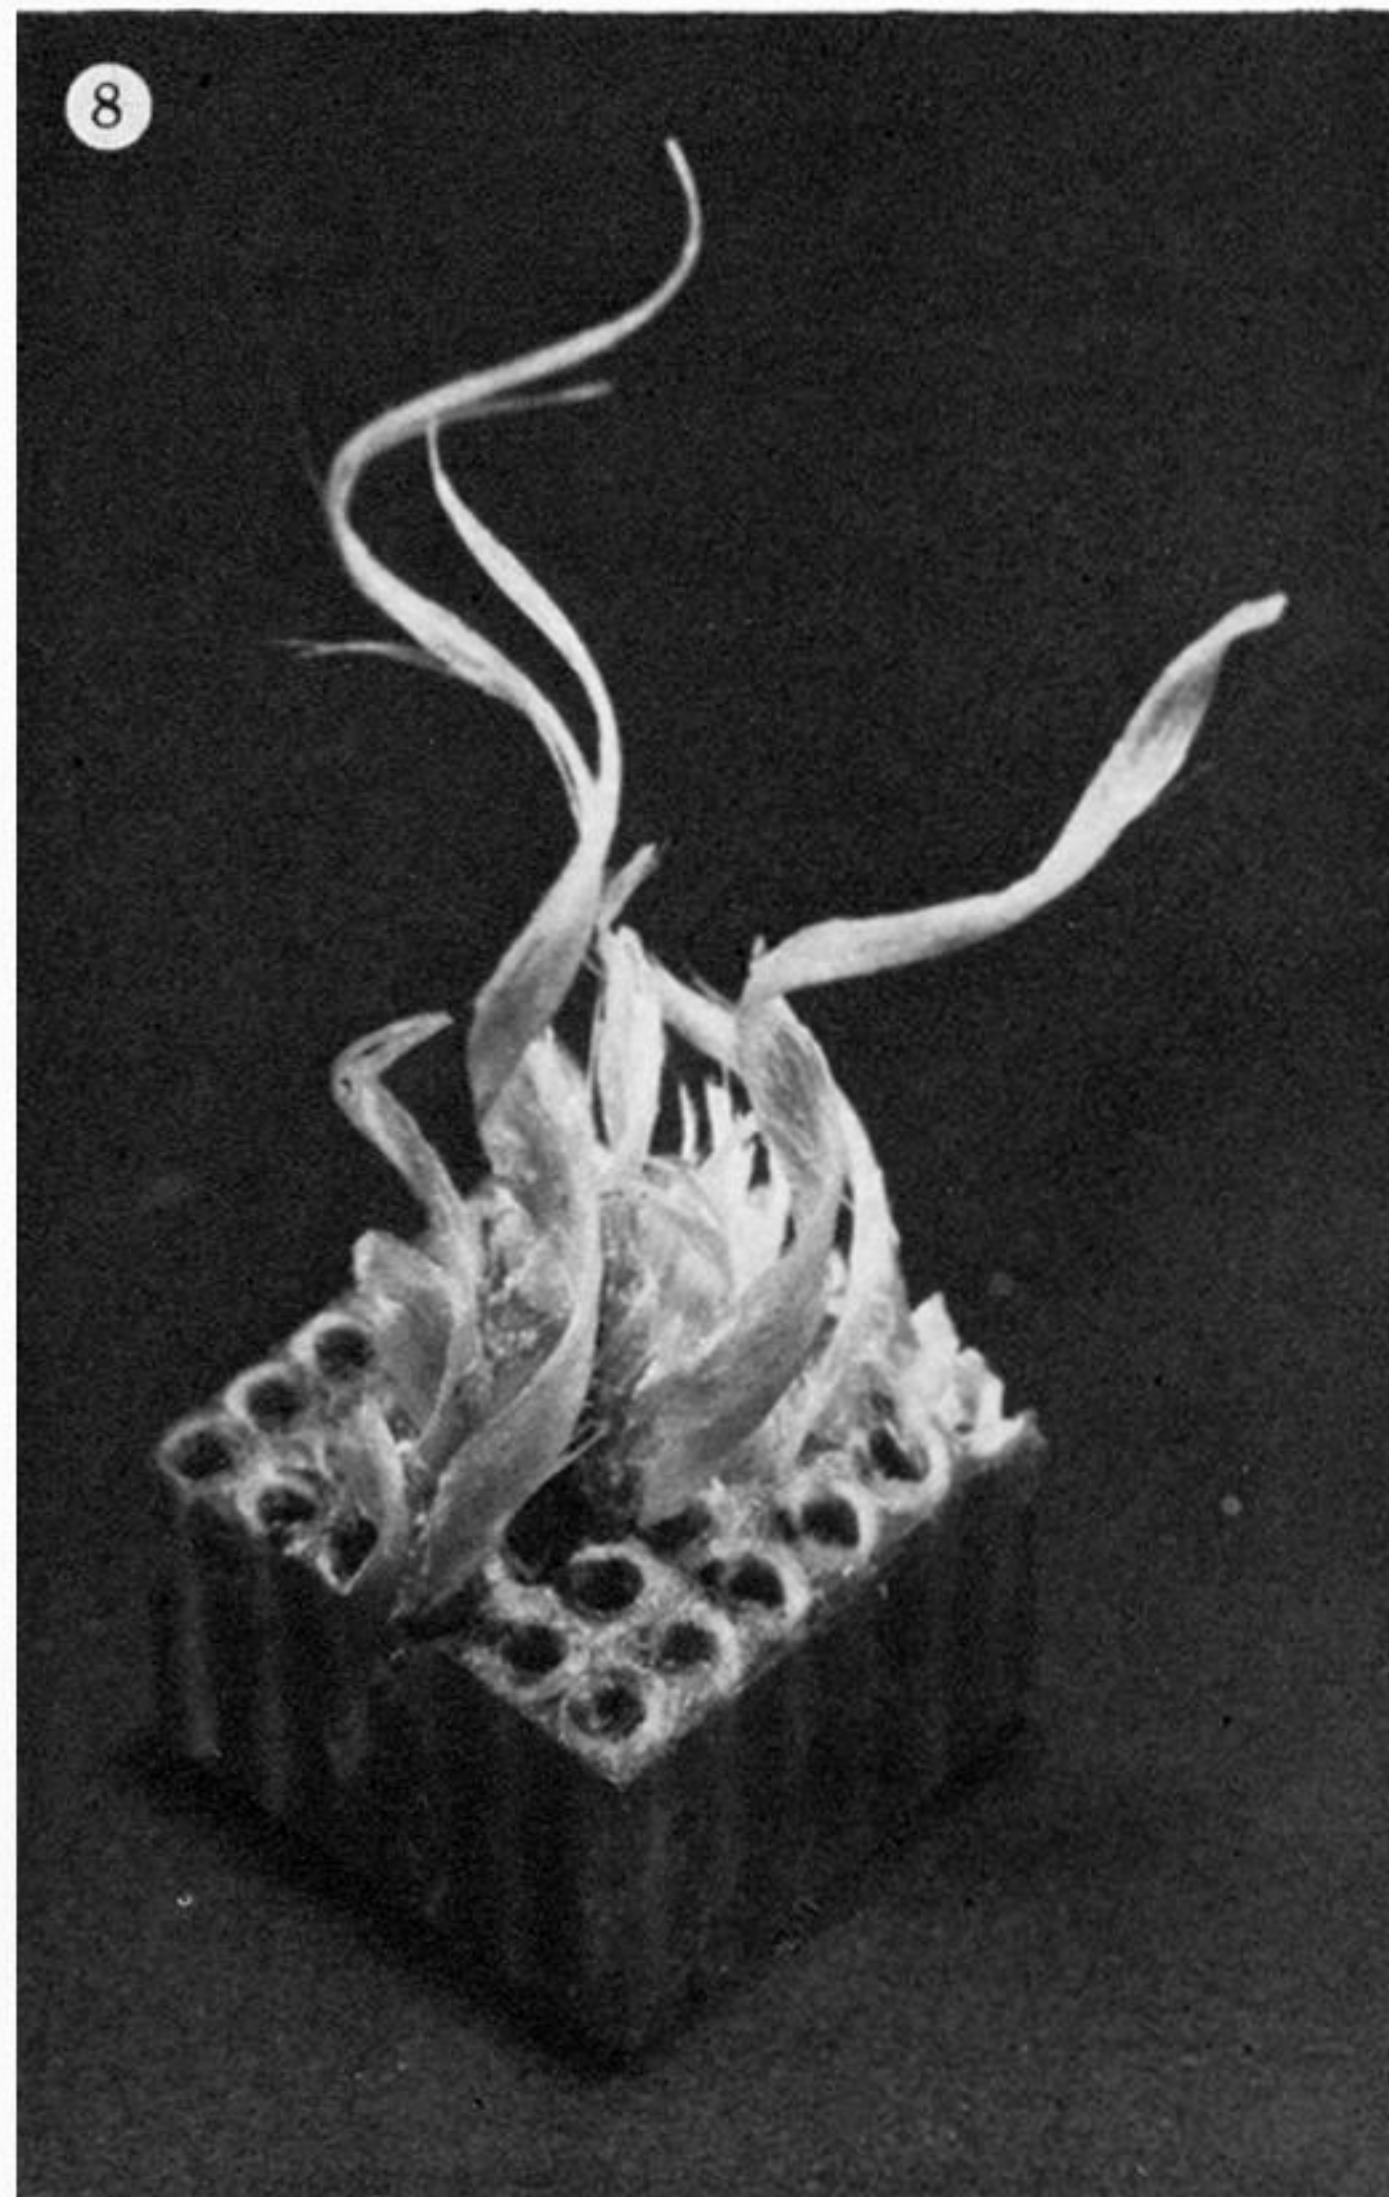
Fracture morphology for composite reinforced with macrofibres of winding angle 35° . Bending fracture (magn. $\times 4$).
